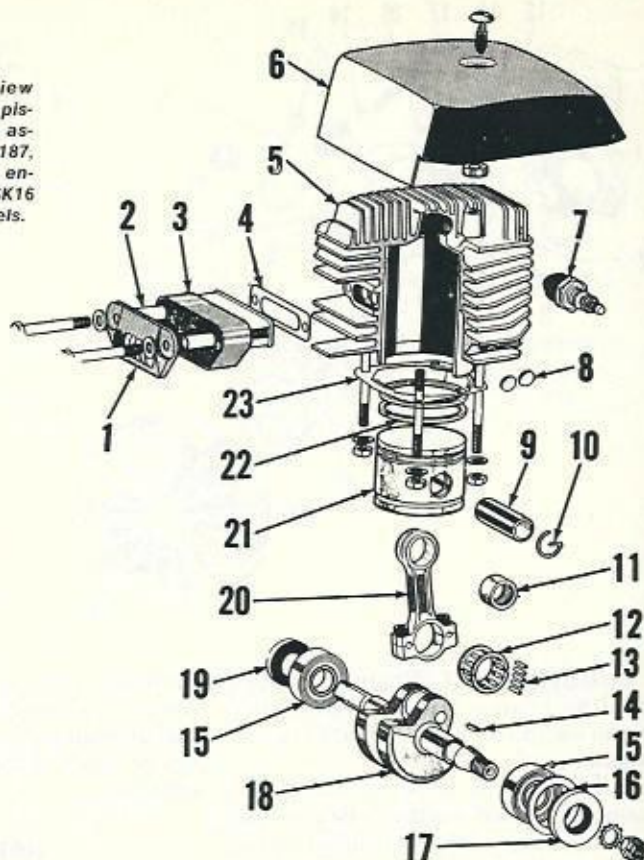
Exploded view of model 275 engine. Other models except models shown in Figs. SK17 or SK18 are similar.
